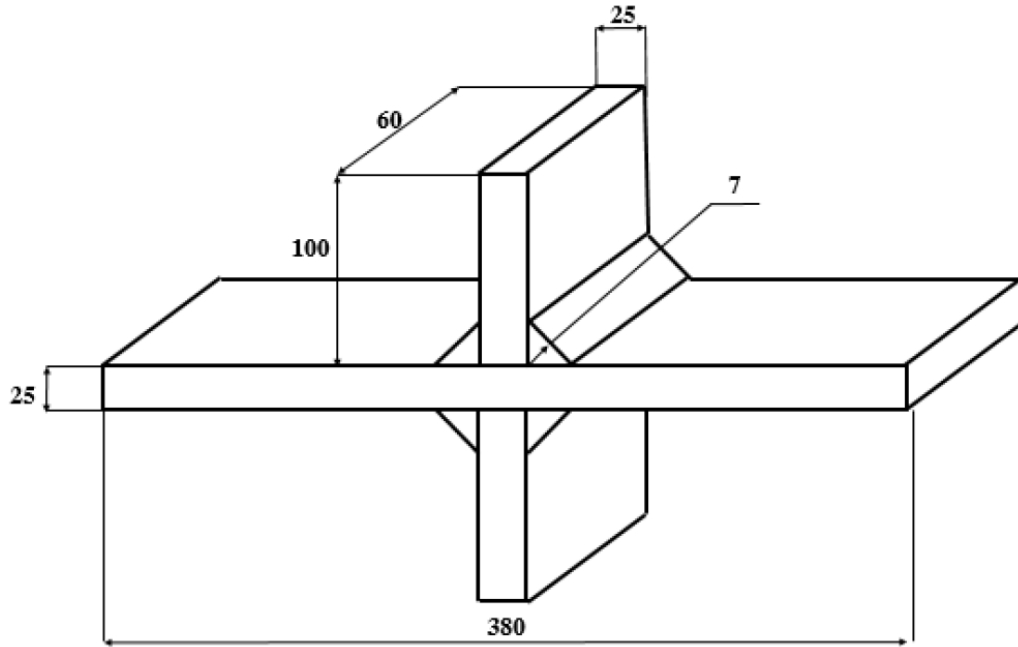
3: Test specimen of welded joint [mm].
